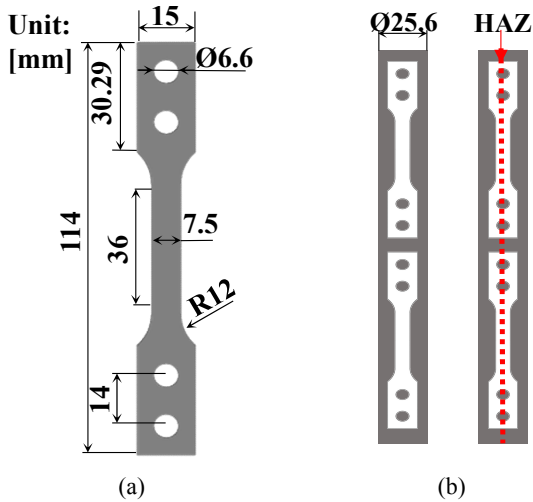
Proceed with the specimen uniaxial tensile test: (a) Tensile test specimen drawing; (b) Sample fabrication position in pipe
